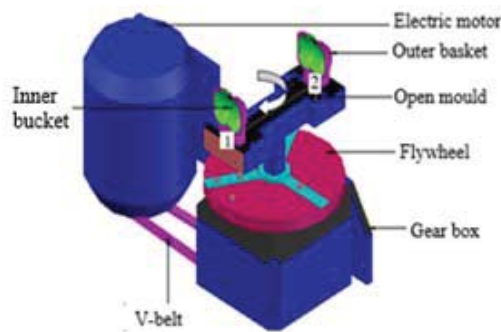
Centrifugal casting machine with an opened mould in which the buckets are facing the same direction
